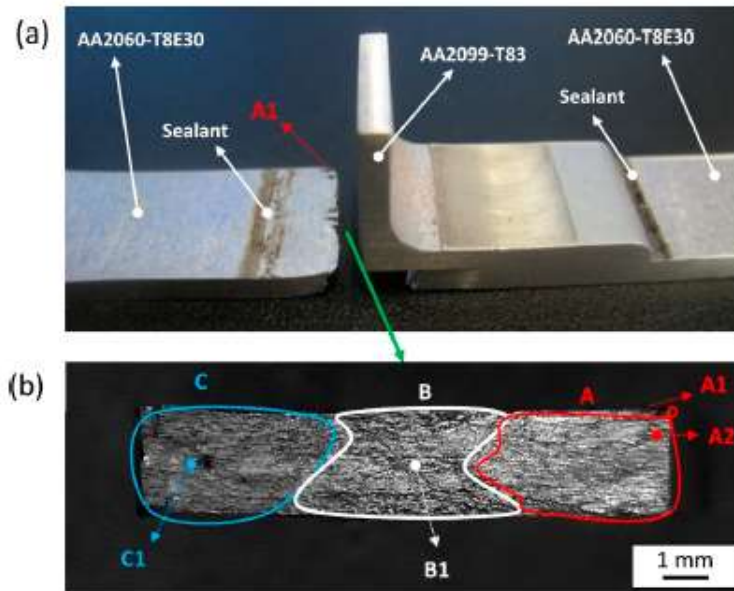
Fracture surface analysis of specimen C05_A showing the fracture out of the FSW joint at 216,817 cycles (a) general view of the fractured specimen and (b) perpendicular view of the fracture surface indicated by the green arrow.
